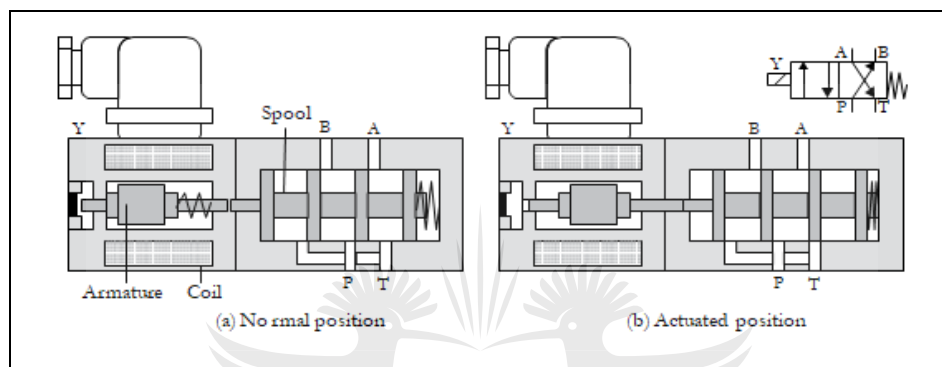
4/2-way Single-solenoid Valve, Spring Return
